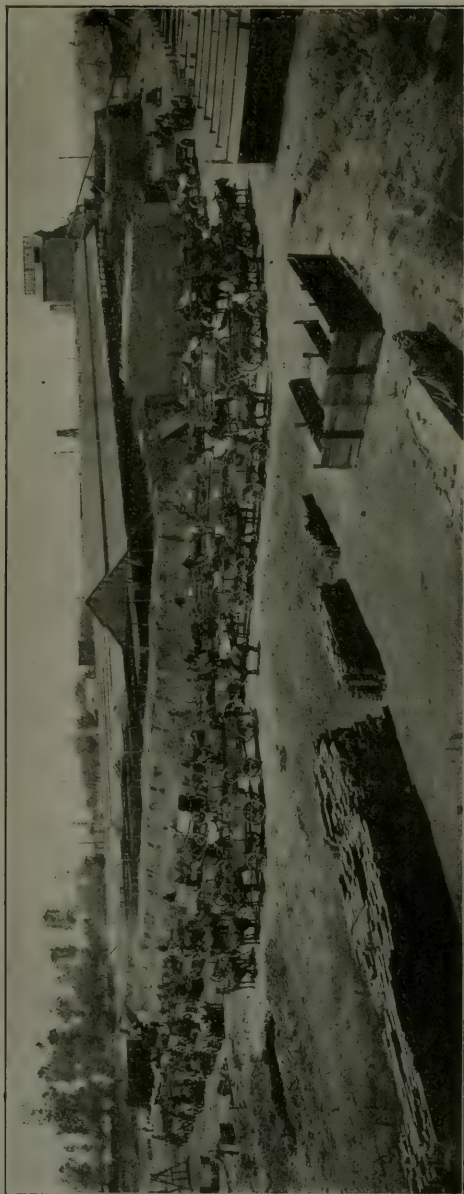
Plant of the Simons Brick Company, Boyle Heights, Los Angeles.
